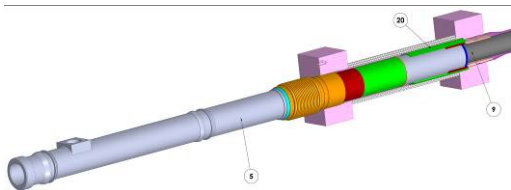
Schematic representation of the end fitting mounting into fuel channel
